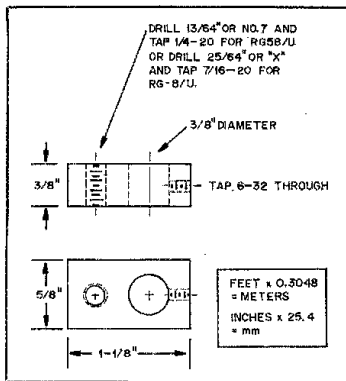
Detail drawing of the stub blocks used to connect and support and the quarter-wave sections.
